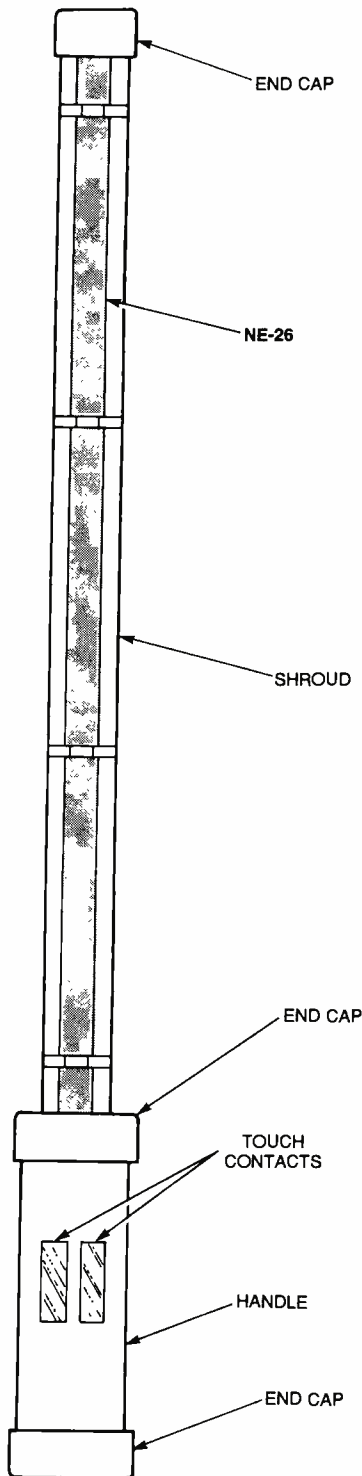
Insert the NE-26 tube assembly with spacer rings and assembled printed-circuit board into the shroud as shown: It may help to moisten the inner walls of the shroud by deeply exhaling into one end and quickly inserting the neon tube assembly.
